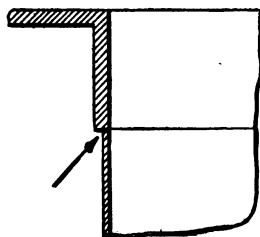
Method of welding together two sheets of different thickness.
